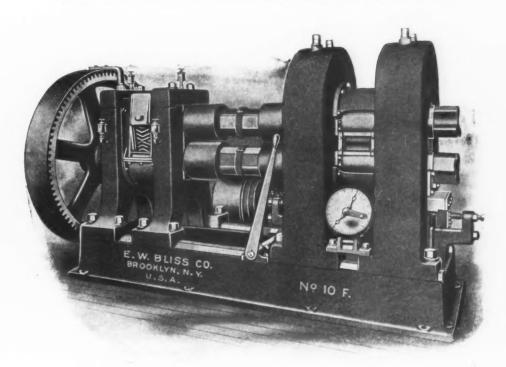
The Bliss Final Finishing Coin Rolling Mill.
